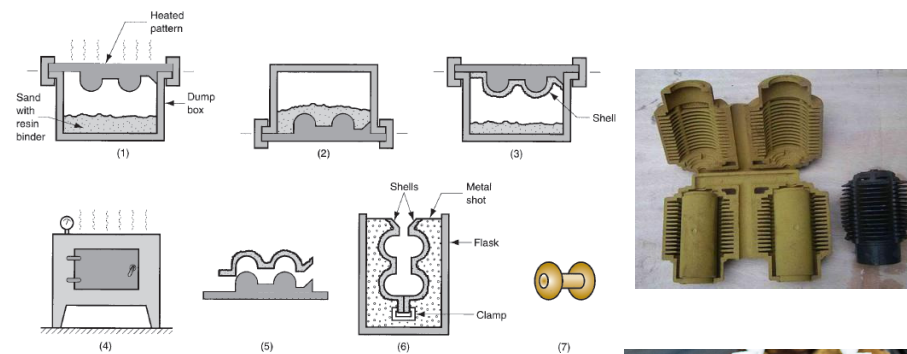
Steps in shell-molding: (1) a match-plate or cope-and-drag metal pattern is heated and placed over a box containing sand mixed with thermosetting resin; (2) box is inverted so that sand and resin fall onto the hot pattern, causing a layer of the mixture to partially cure on the surface to form a hard shell; (3) box is repositioned so that loose, uncured particles drop away; (4) sand shell is heated in oven for several minutes to complete curing; (5) shell mold is stripped from the pattern; (6) two halves of the shell mold are assembled, supported by sand or metal shot in a box, and pouring is accomplished. The finished casting with sprue removed is shown in (7).
